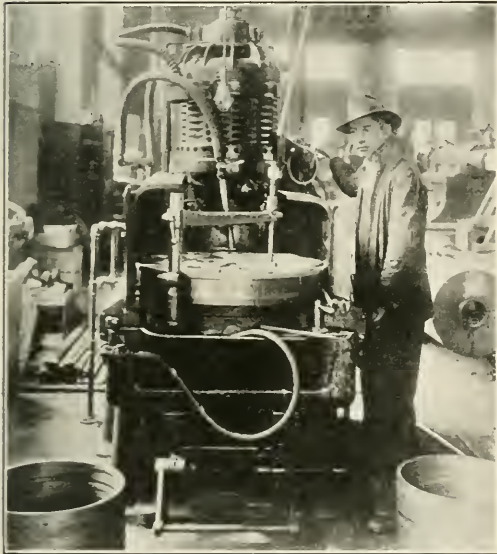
Blanchard Direct Motor Driven Grinder Finishing Crank Pin Collars
